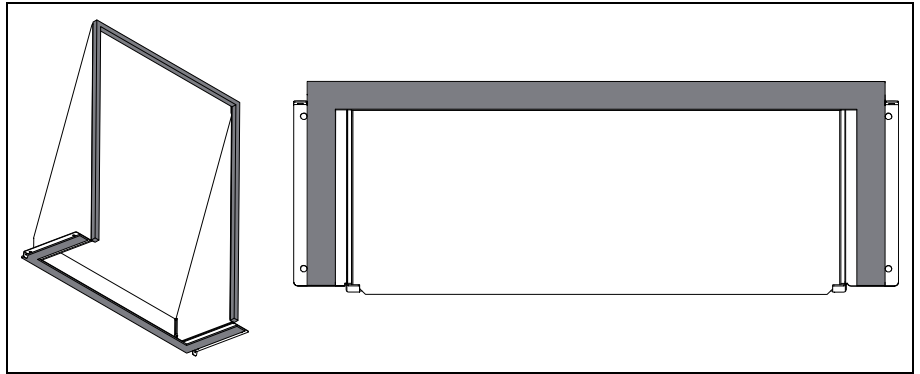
Gasket on contact surface between the vertical and horizontal parts
